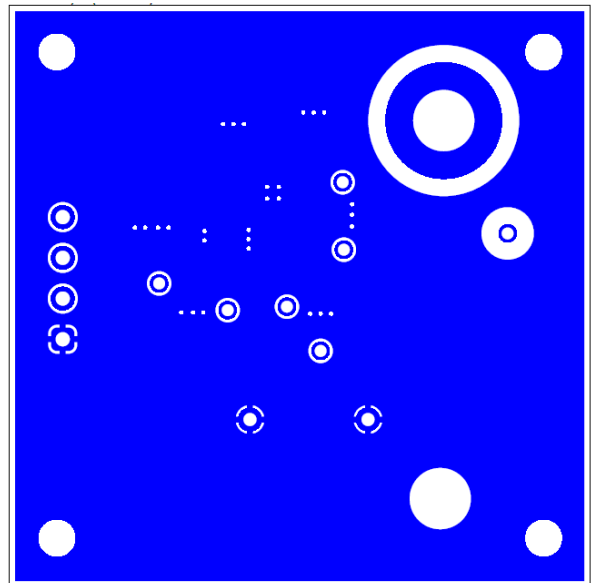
FAD1101AEVB PCB Internal Plane 2 Drawing
